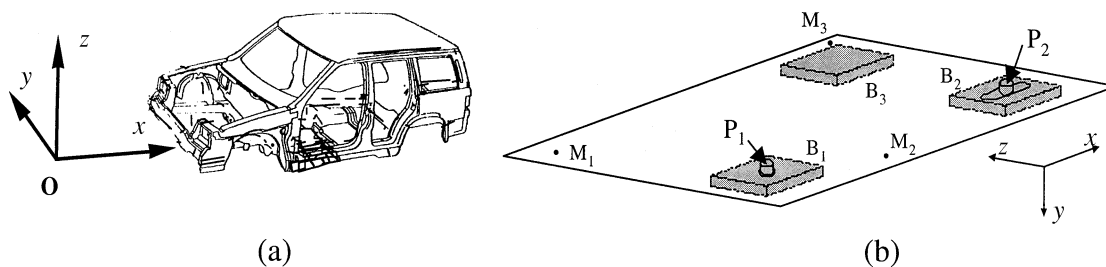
Automotive body and its assembly fixture: (a) body coordinate system; and (b) the 3-2-1 fixturing principle for a rigid part.
